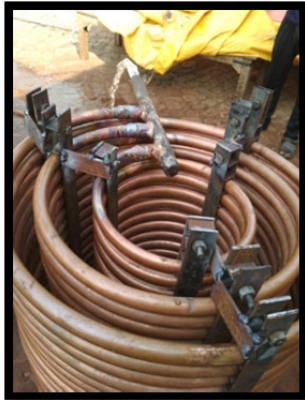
The inside view of triple coil helical shell and tube type heat exchanger [20]
